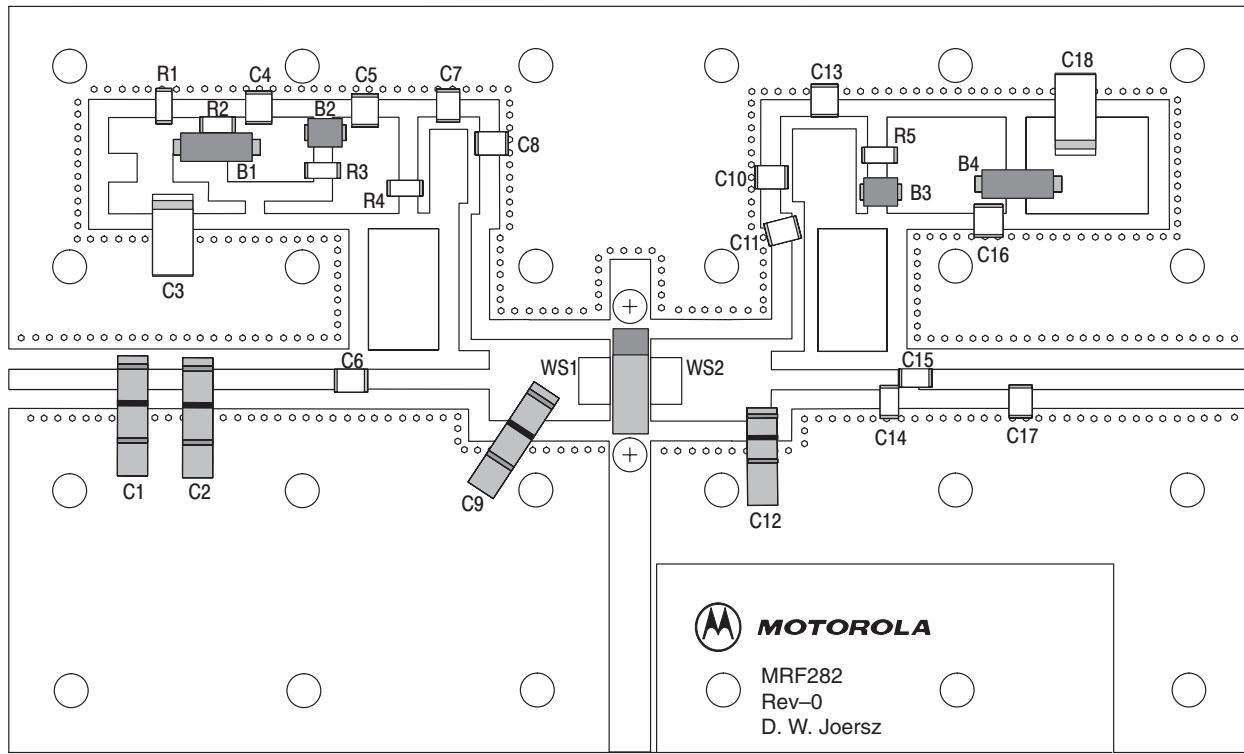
1.93–2.0 GHz Broadband Test Circuit Component Layout
